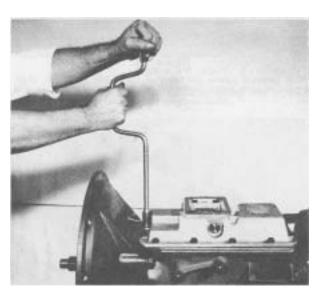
Remove remote control or shift tower from control cover. Remove control cover capscrew and lockwashers.
